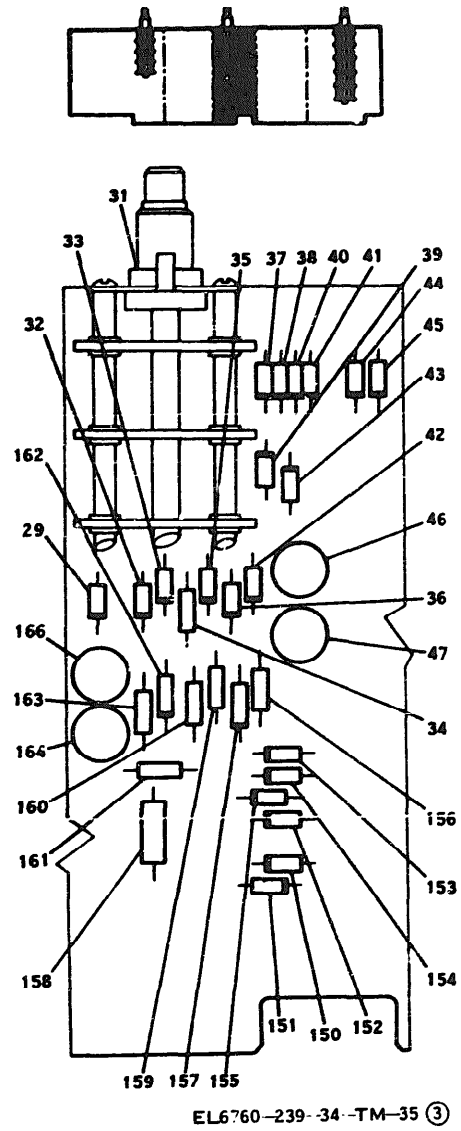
(3) Printed circuit board and component assembly A16, parts location (sheet 3 of 5).
